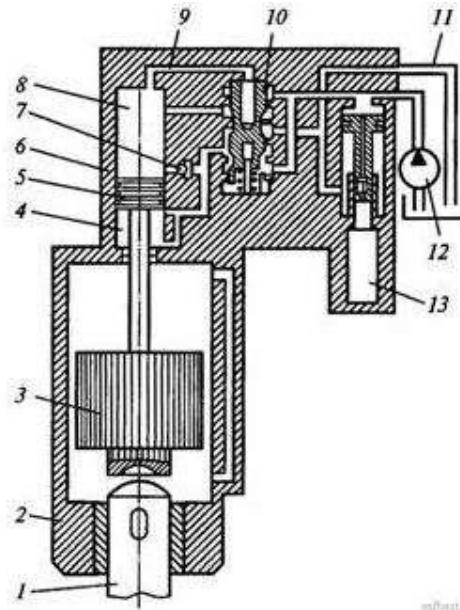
Fundamental scheme hydraulic hammer with hydraulic accumulator [7, 11]
